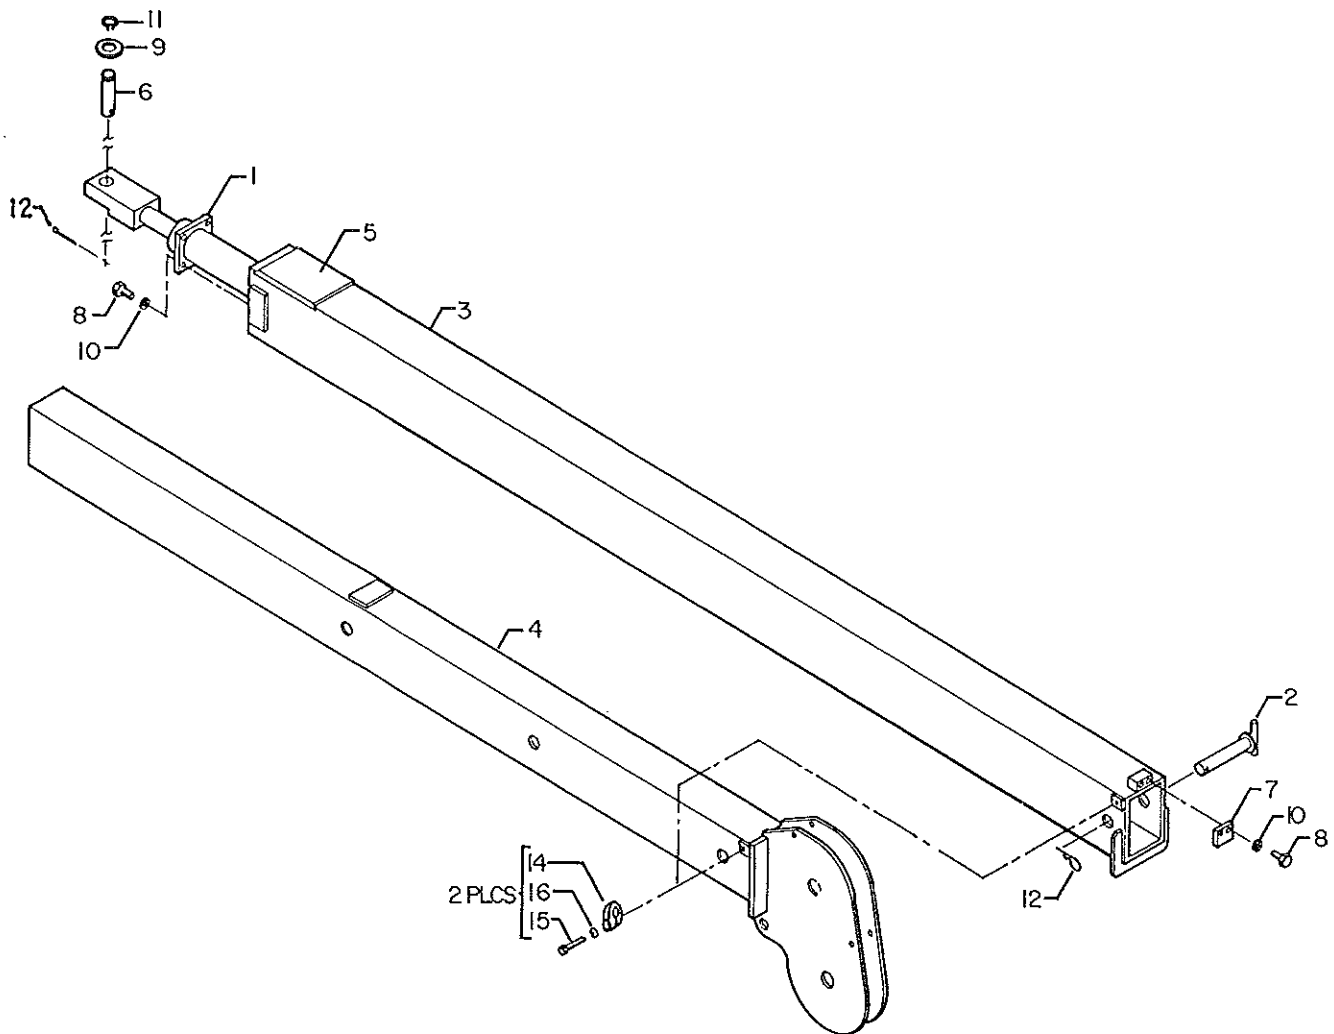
LOWER BOOM CYLINDER (3C038940)
